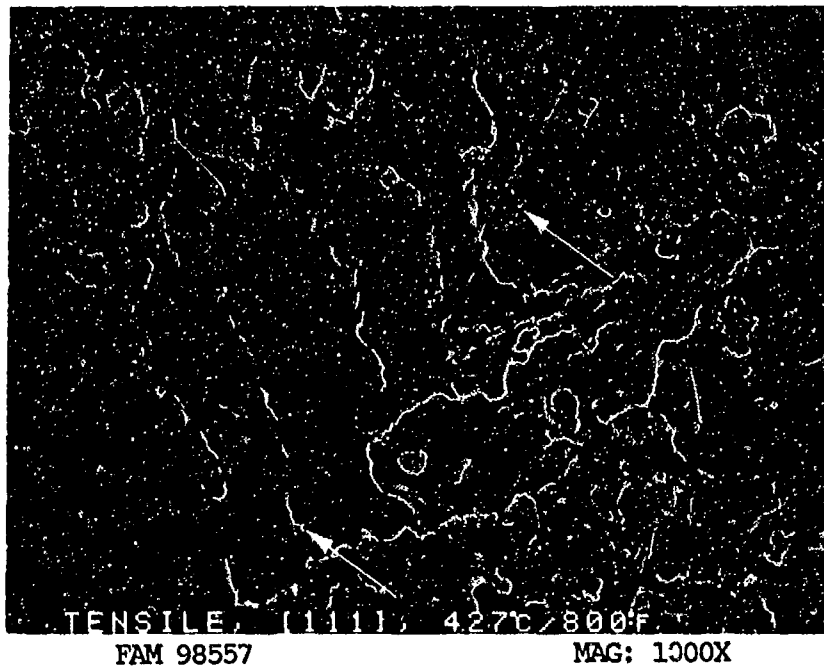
Higher magnification photograph showing cleavage fracture. Slip lines are visible (arrows).
